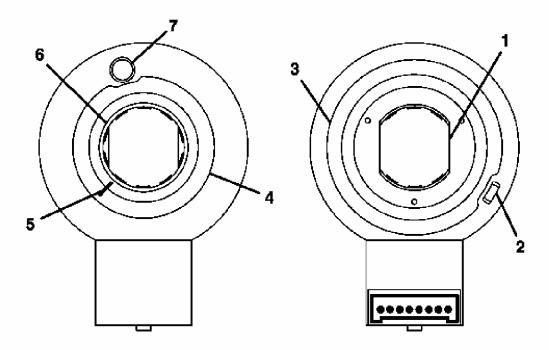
Verifying Steering Wheel Position Sensor Identification Points Courtesy of GENERAL MOTORS CORP.
